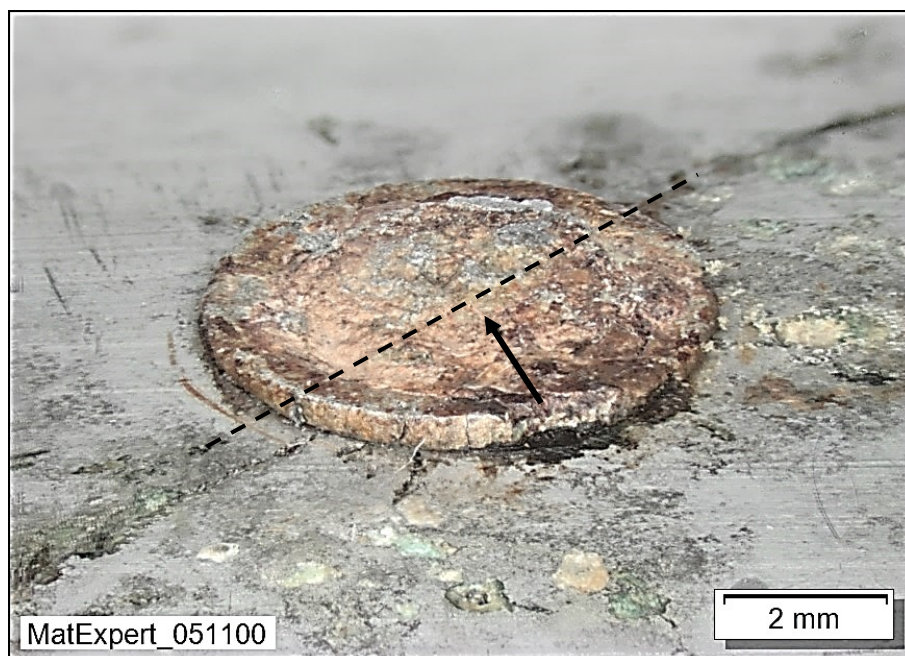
Cross section of rivet N3 – pitting and surface corrosion of sheet steel and aluminium rivets.
